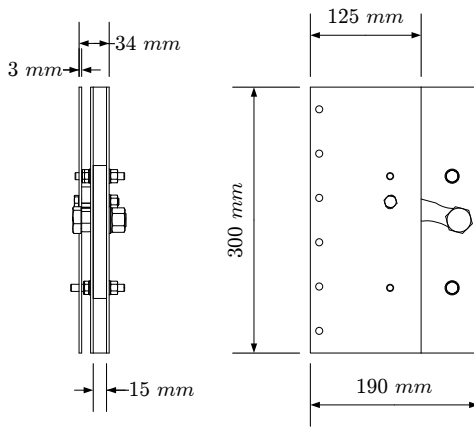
The fixture consists of a three thick steel plates tightened together with possibility for adjusting the position of the nut.
